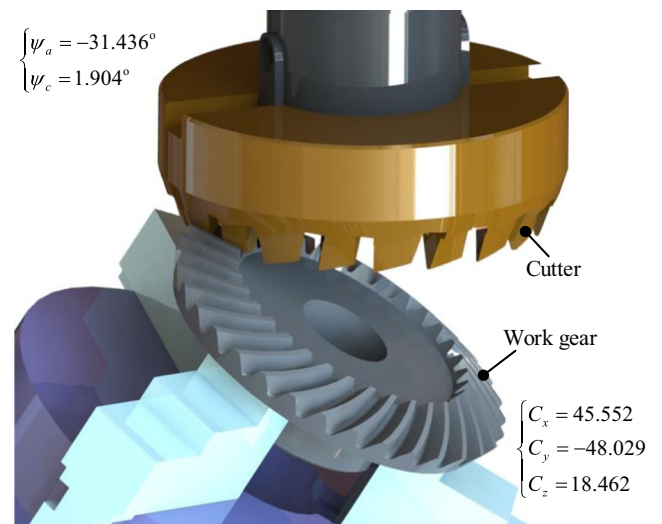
Theoretical cutting position of the gear when $\phi_c = 0$ on the five-axis machine
